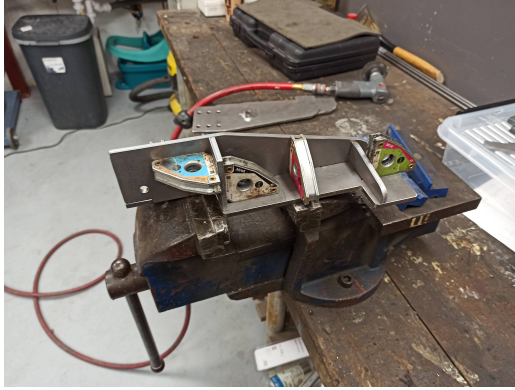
Laser-cut plates of the backside mount assembled and prepared for welding
